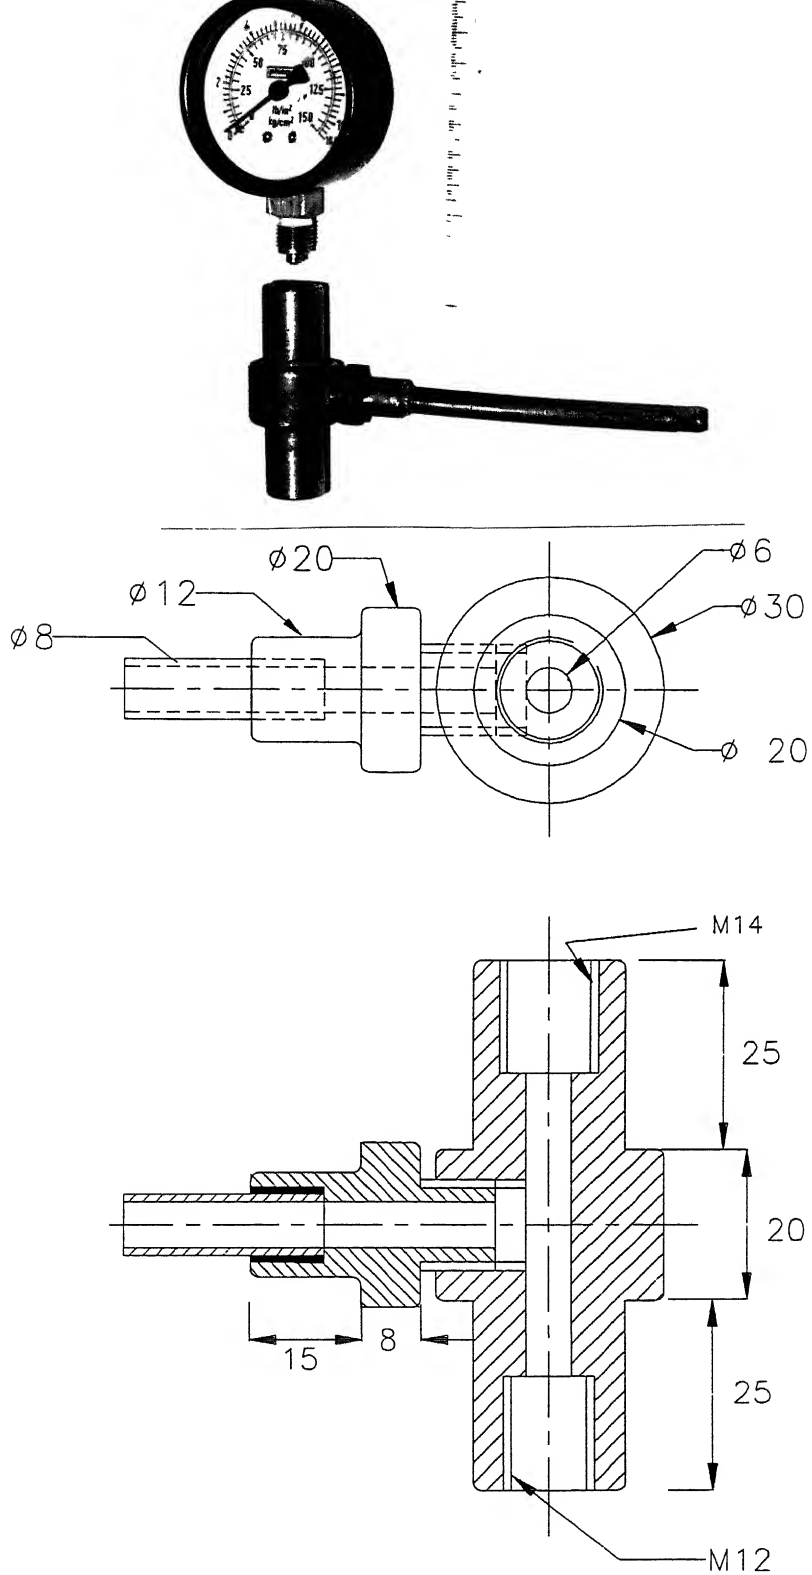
21 Photograph and drawing of the 3-Way Adaptor
